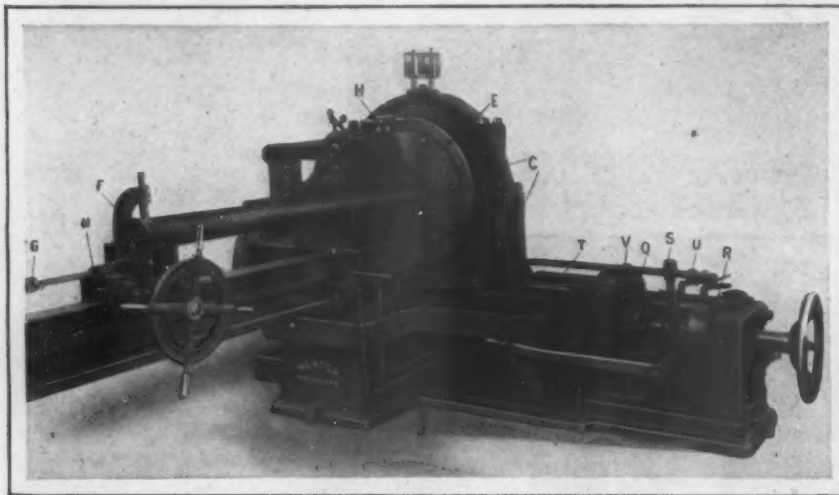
Operating Side of a New 5-In. Internal Cutting-Off Machine Built by the Newton Machine Tool Works, Inc., Philadelphia, Pa.
